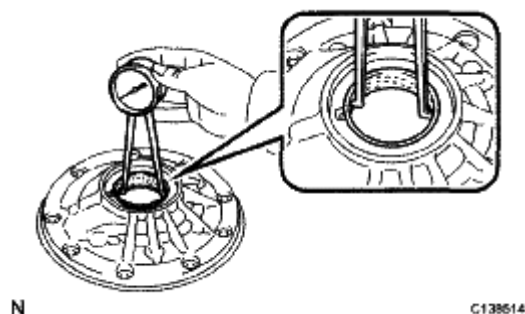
Measuring Inside Diameter Of Oil Pump Body Bushing
